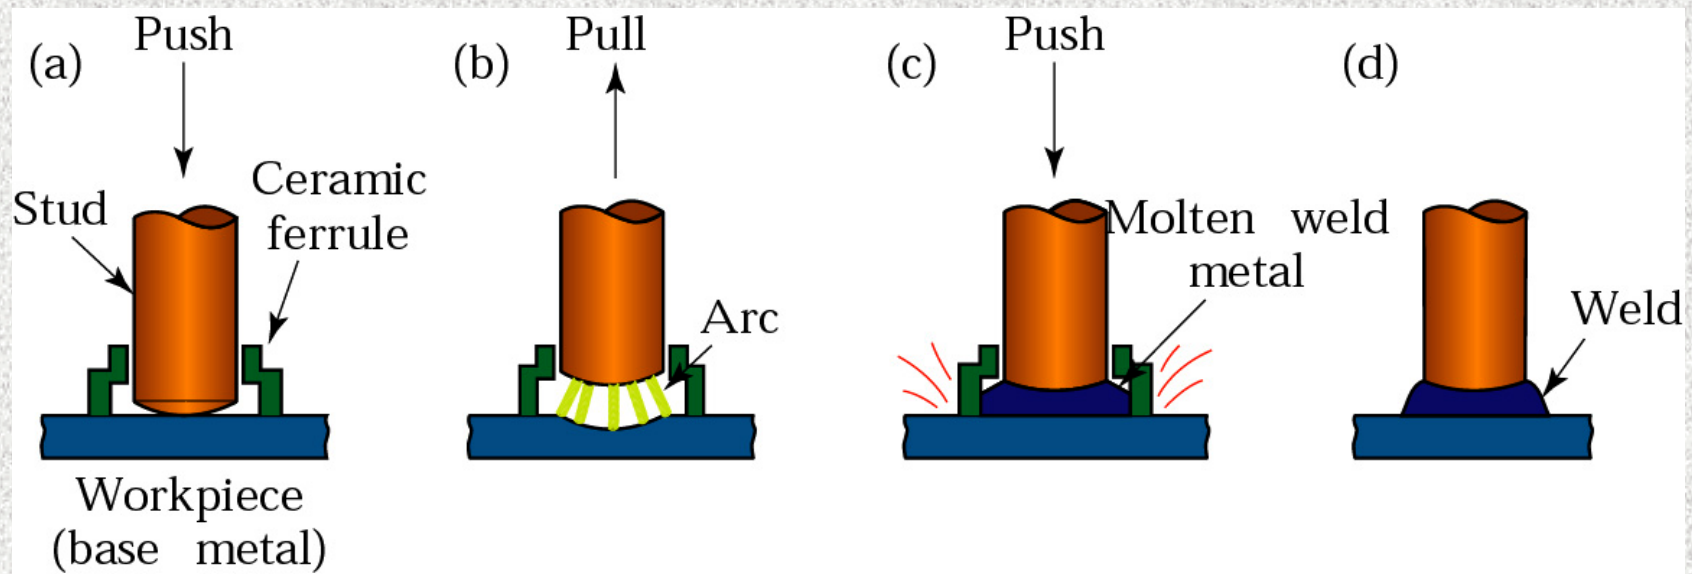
The sequence of operations in stud welding, which is used for welding bars, threaded rods, and various fasteners onto metal plates.
